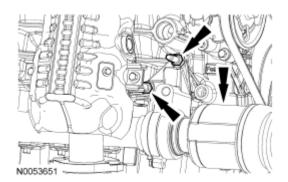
Identifying RH Catalytic Converter Support Bracket & Bolts Courtesy of FORD MOTOR CO.
